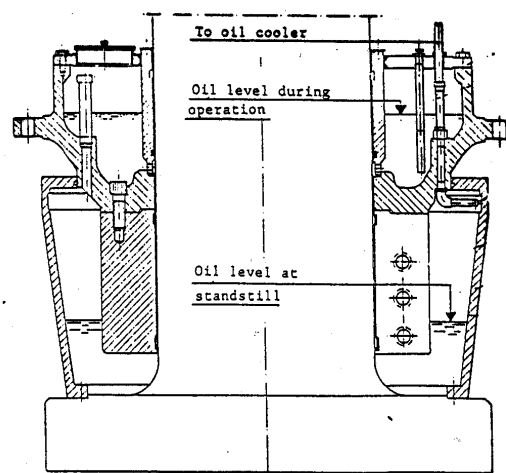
Details of the self lubricated air-cooled bearing of a vertical Pelton turbine made by Kværner.
